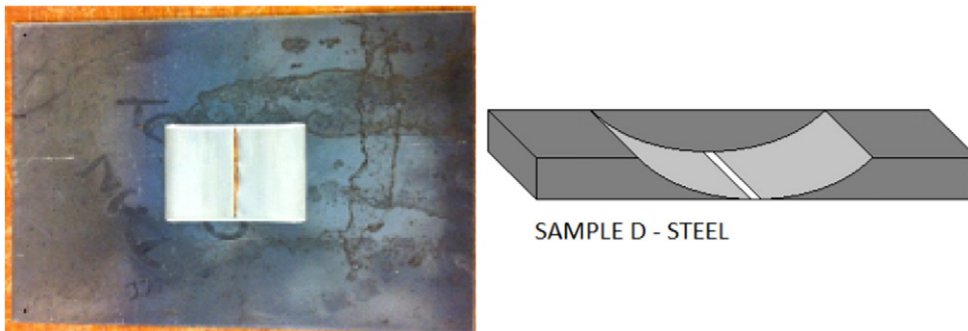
Photograph and longitudinal cross-section of sample D – steel.
